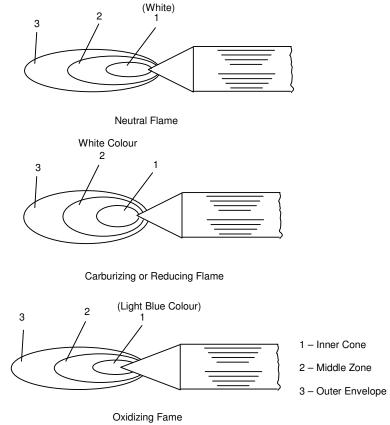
Three Types of Flames in Oxyacetylene Welding
